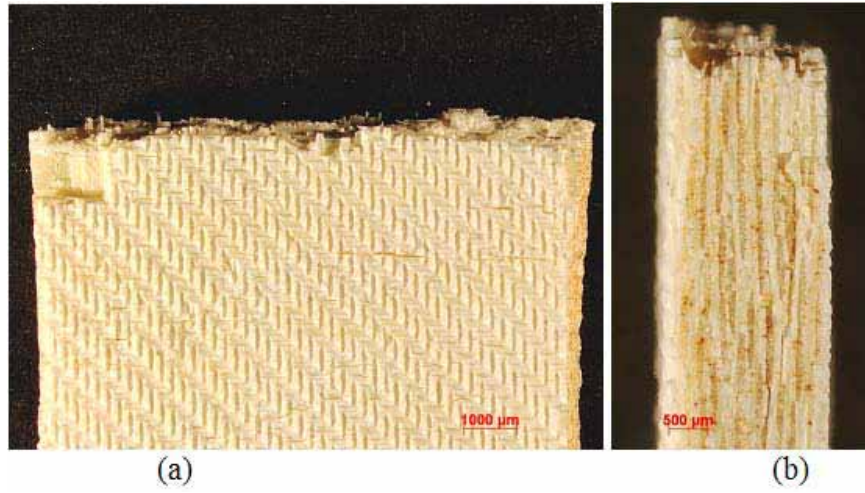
Fracture surface of C5 composite specimen tested in tension to failure at 1100 °C in laboratory air: (a) front view and (b) side view.
